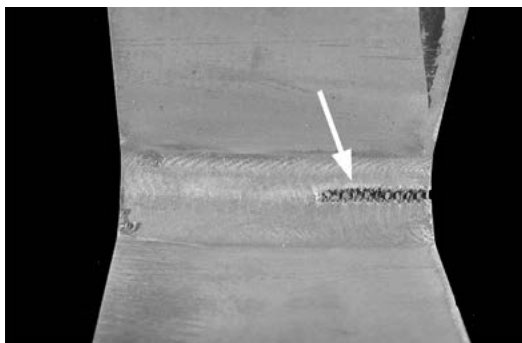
Fillet weld face with a scratch after making approximately 5 cm of the joint (marked with the arrow)
